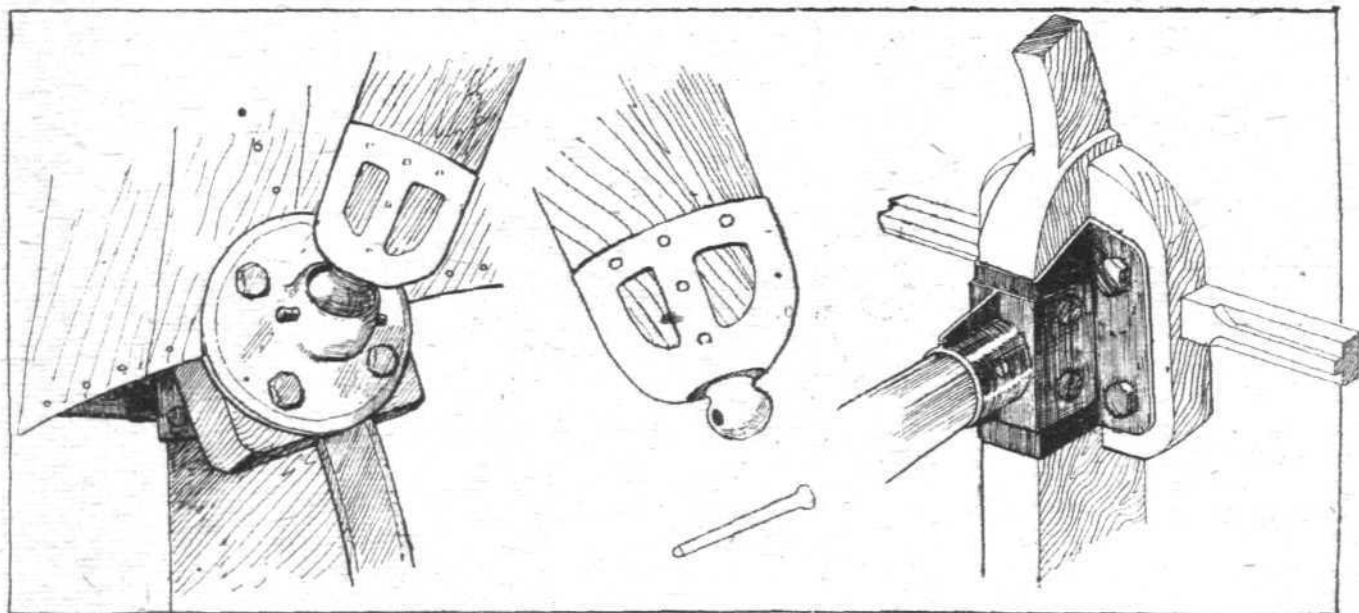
Attachment of centre section struts to body on the Pfalz.
